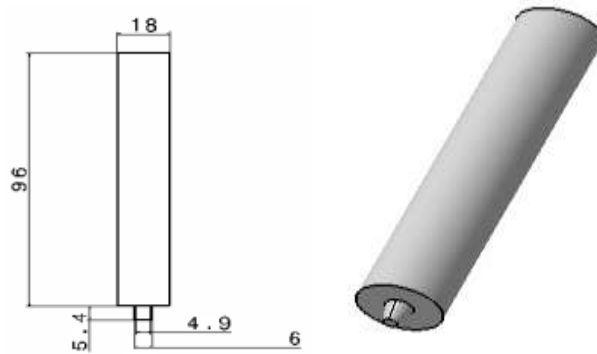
D and 3D model of FSW tool with Threaded Frustum Pin
